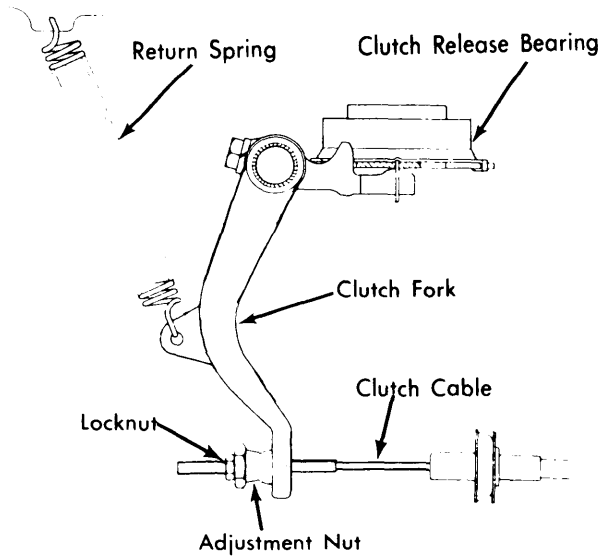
Clutch Actuating Components Showing Cable Adjustment Point
